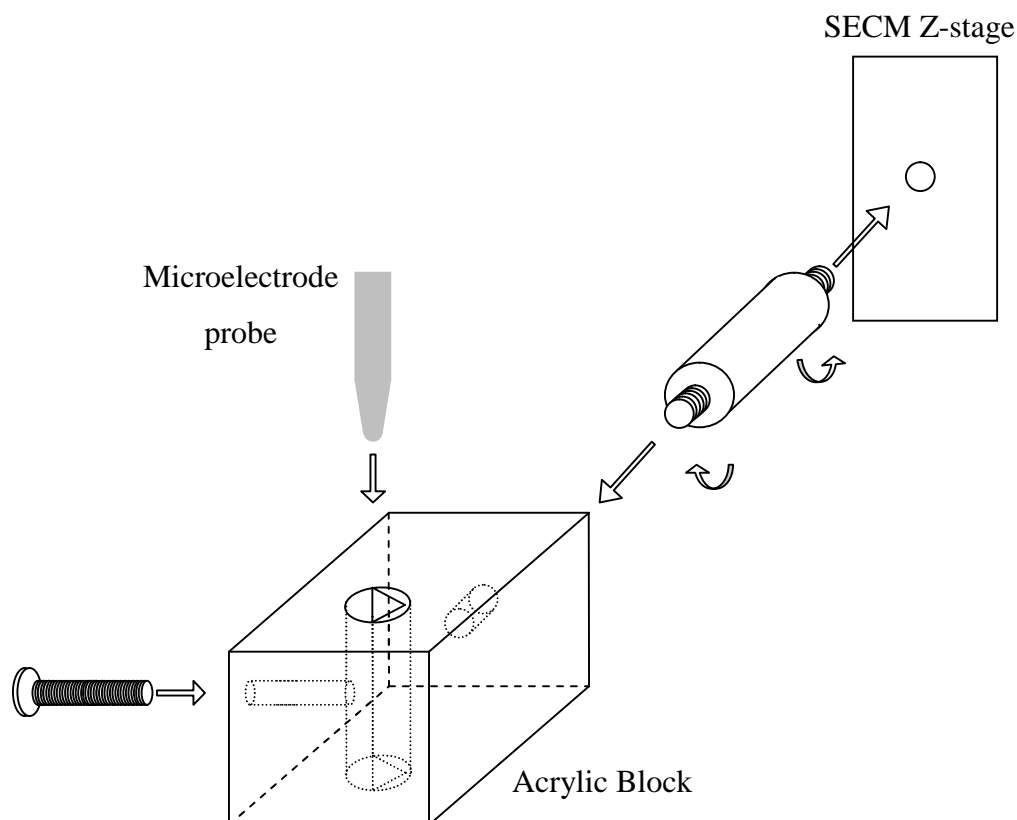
Exploded schematic of the microelectrode probe clamping mechanism
